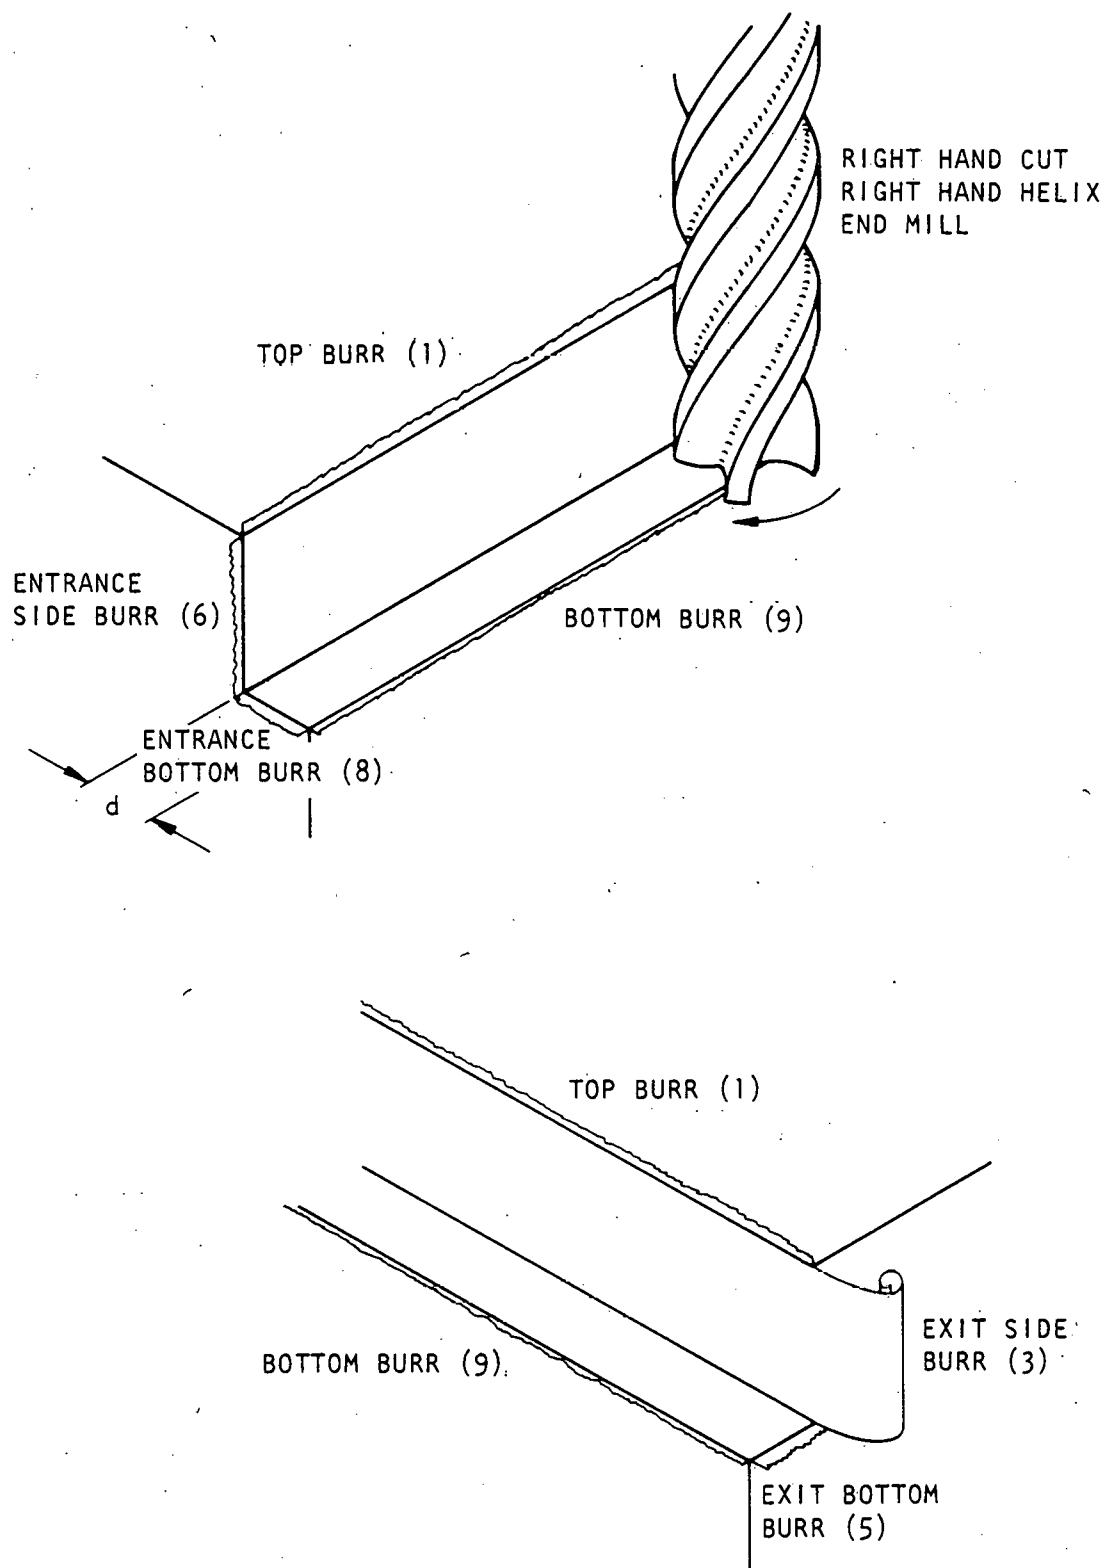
Identification of Burr Locations in End Milling Workpiece Edges
